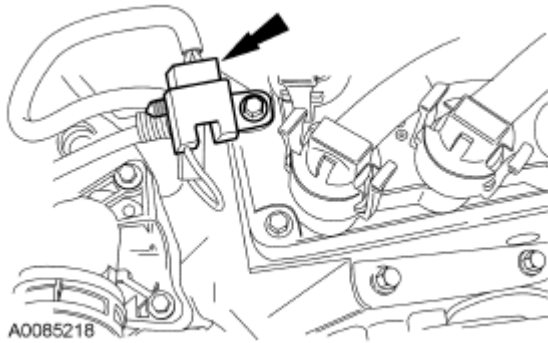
Locating Radio Ignition Interference Capacitor Electrical Connector
